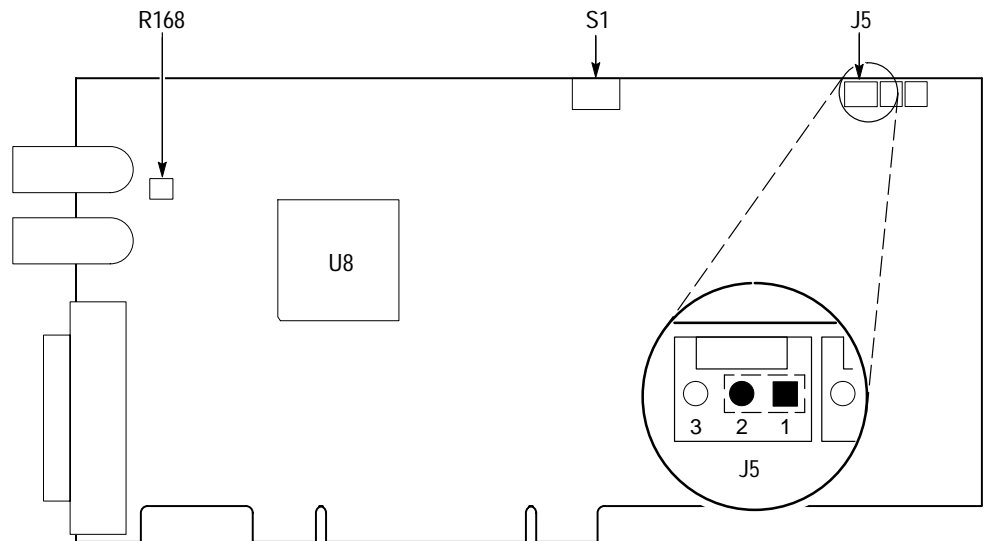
SSI circuit board showing location of S1, J5, and R168
